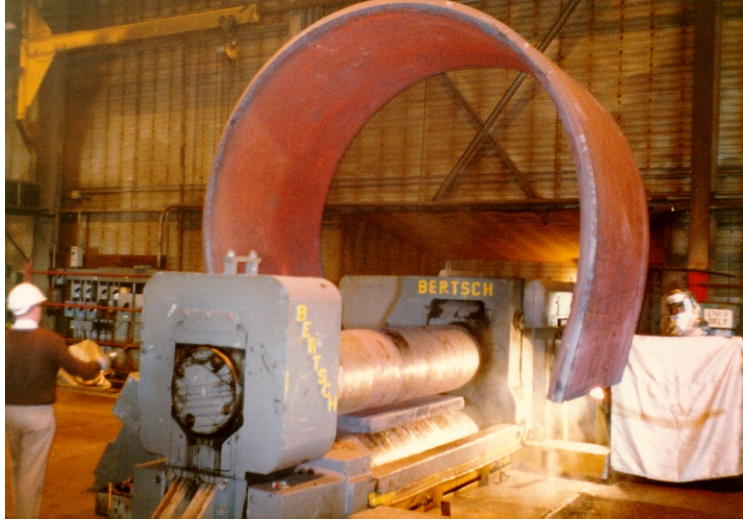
A 4½ inch thick plate being hot roll formed into a cylindrical section for a pressure vessel.
